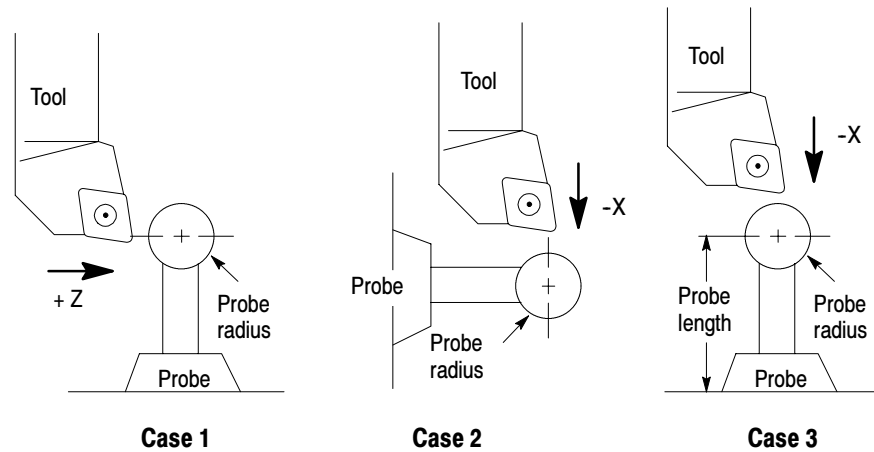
illustrates 3 typical tool gauging configurations. All 3 cases assume that the probe is at a known, fixed point on the machine.
